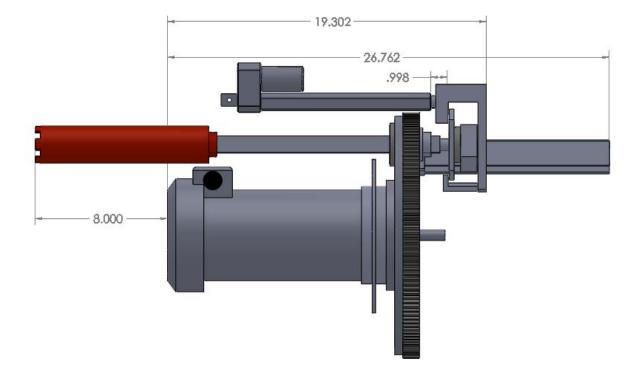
Core drill design #7, view with 8 inch drill bit extrusion.
